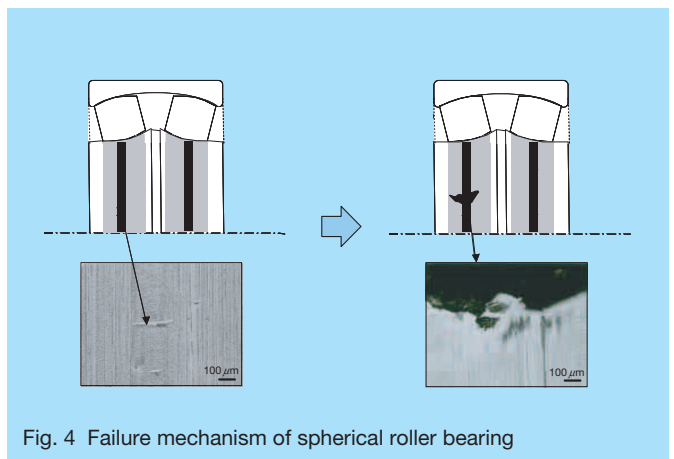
Failure mechanism of spherical roller bearing
